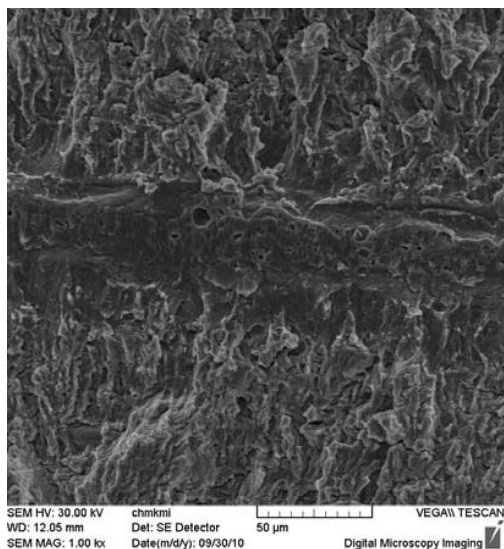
The placement of final fracture into the middle of the sheet thickness
